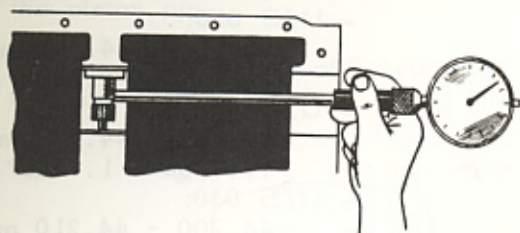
Measuring Camshaft Bearing Bore X4948
